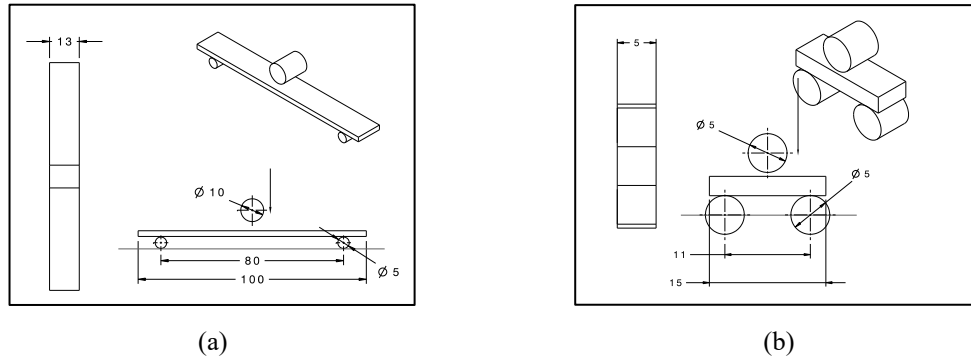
Dimensions and boundary condition of the specimens for the (a) three-point flexural test and (b) Short-beam shear test (All dimensions are in mm)
